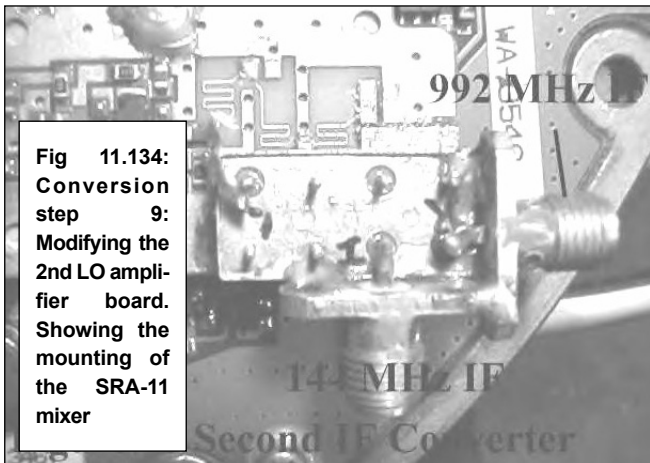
Conversion step 9: Modifying the 2nd LO amplifier board. Showing the mounting of the SRA-11 mixer
